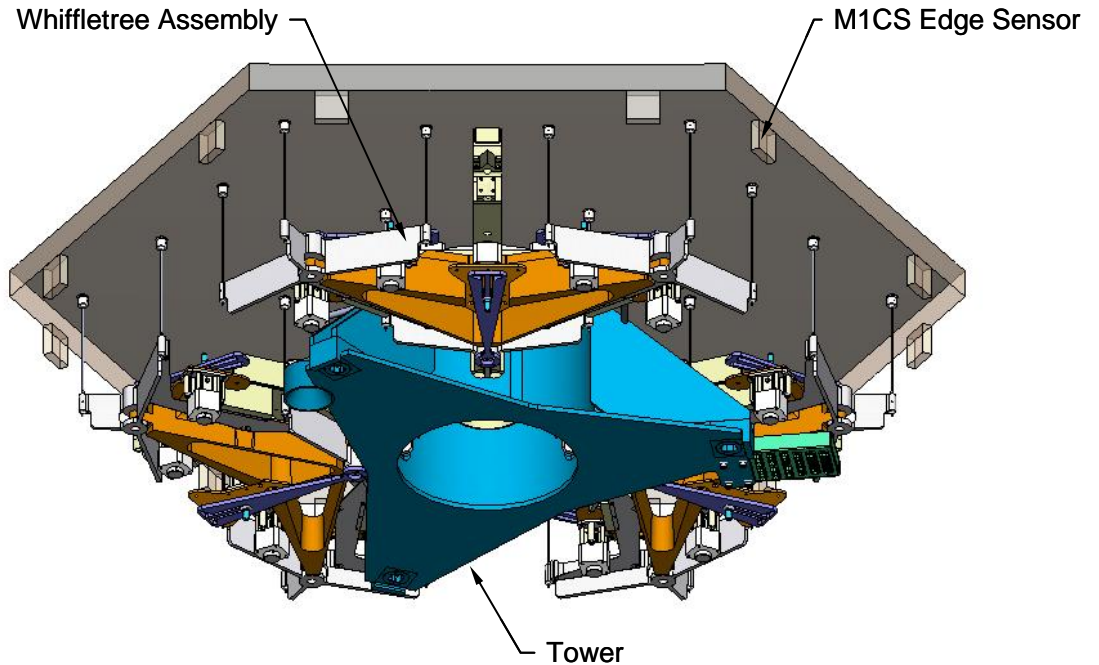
Polished Mirror Assembly (PMA) with edge sensors
